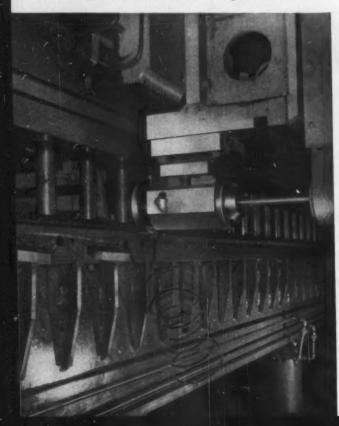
Machine which trims sheets up to 16 feet wide straight within 0.002 inch and also turns up a narrow edge to facilitate fusion welding.
